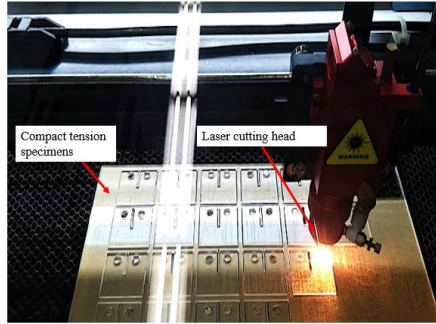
Preparation of compact tension specimens using laser cutter machine.
